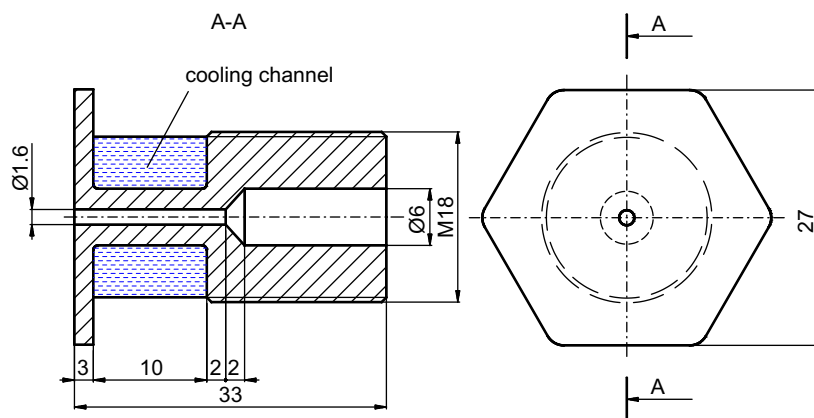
Section view of basic replaceable capillary die with dimensions.
